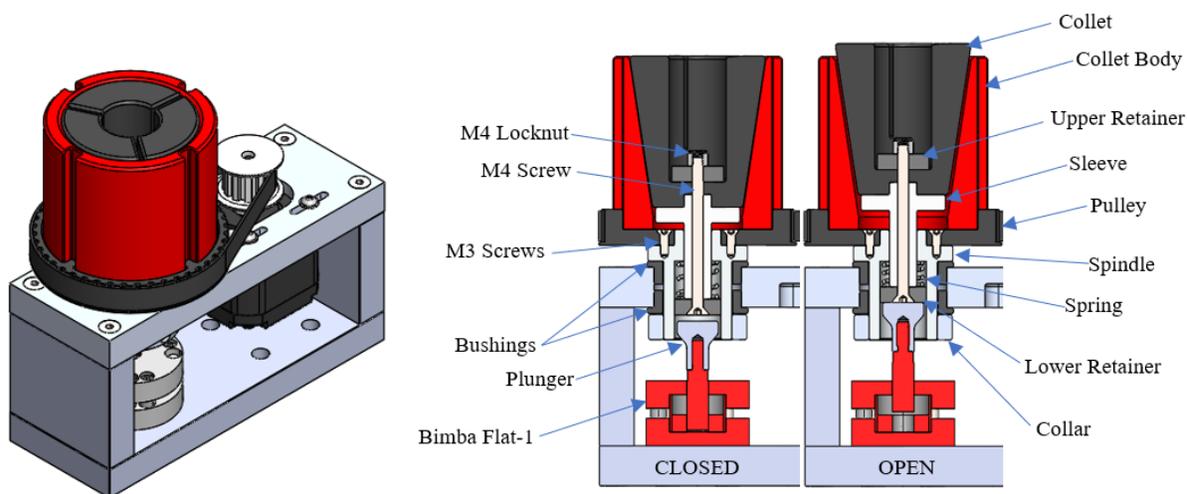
Rotating Vial Grip Station Assembly and Cross-Section Views
